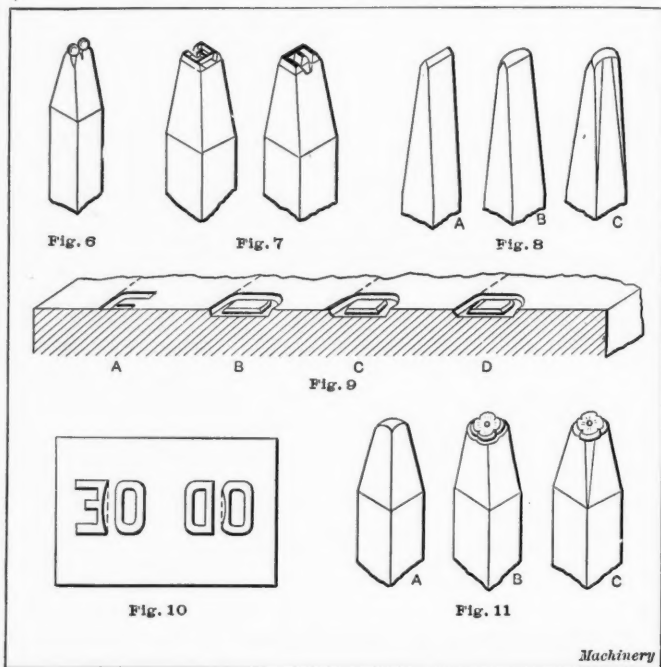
The Face of a Name-plate Die. Fig. 6. A Double-bead Punch. Fig. 7. Comparison between a Die Letter and an Ordinary Stamping Letter. Fig. 8. Three Types of Lining Tools. Fig. 9. Illustrating Points in Stamping. Fig. 10. How Close Stamping displaces the Steel. Fig. 11. Three Steps in Making a Punch.
